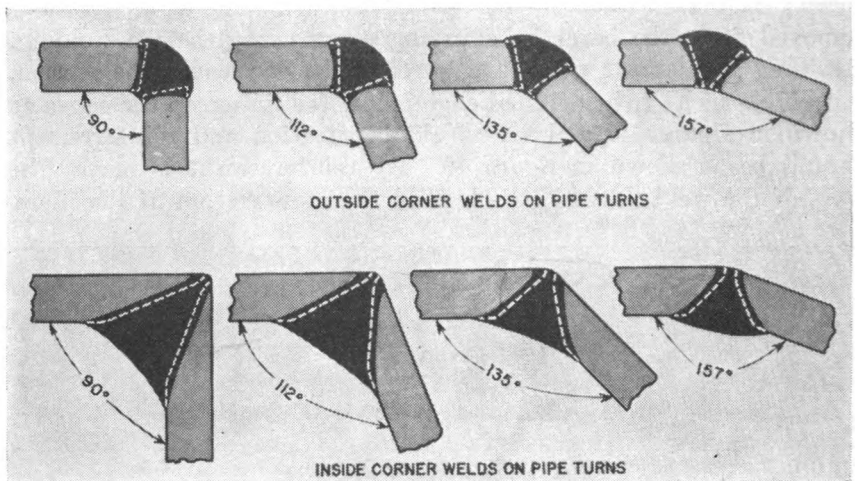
Outside and inside corner welds in pipe turns.
